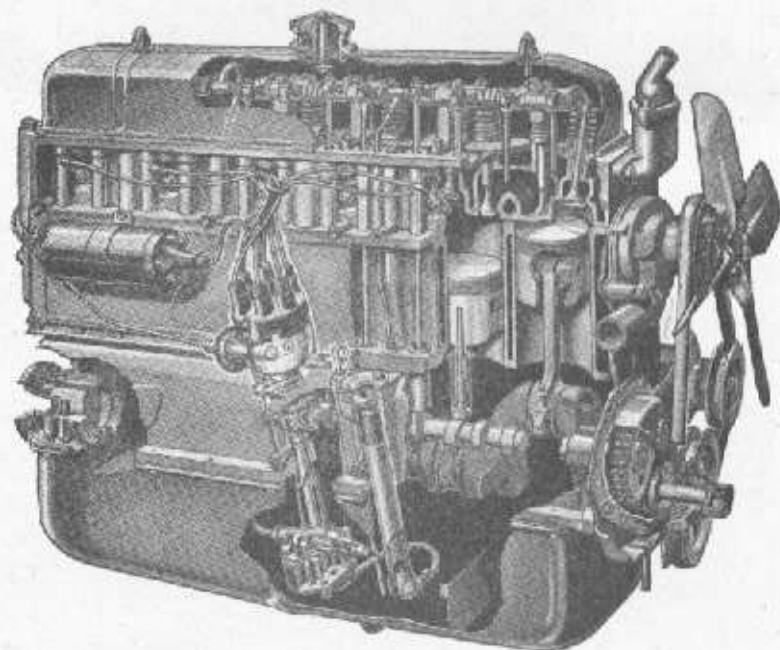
Cutaway view of Bedford 28 h.p. engine.
